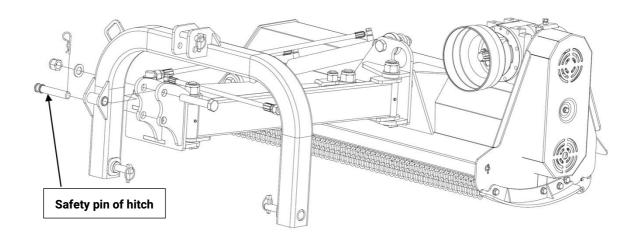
Installing Hitch Tube Weldment and Fittings
